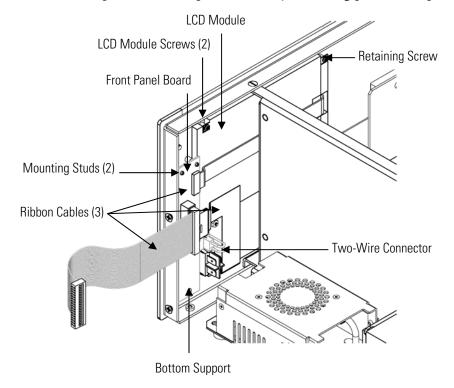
Replacing the Front Panel Board and the LCD Module
